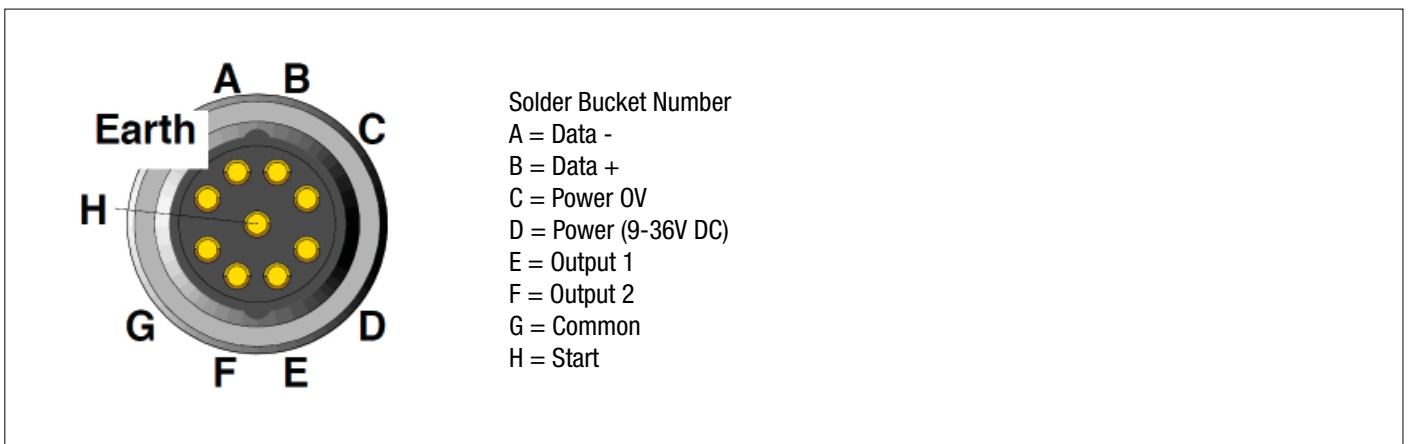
Cable Wiring Details (as viewed when looking at supplied male connector)
